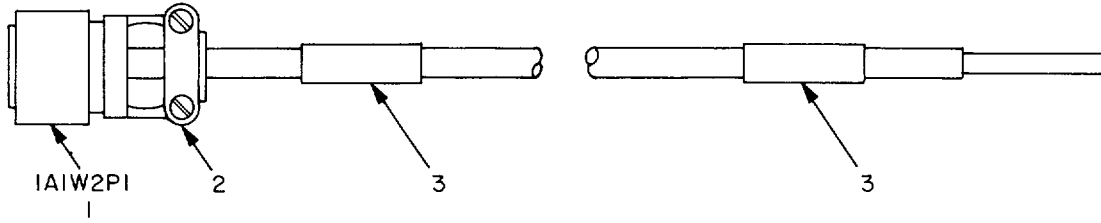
Cable Assembly, Power, Electrical (10 Ft) 1A1W2
